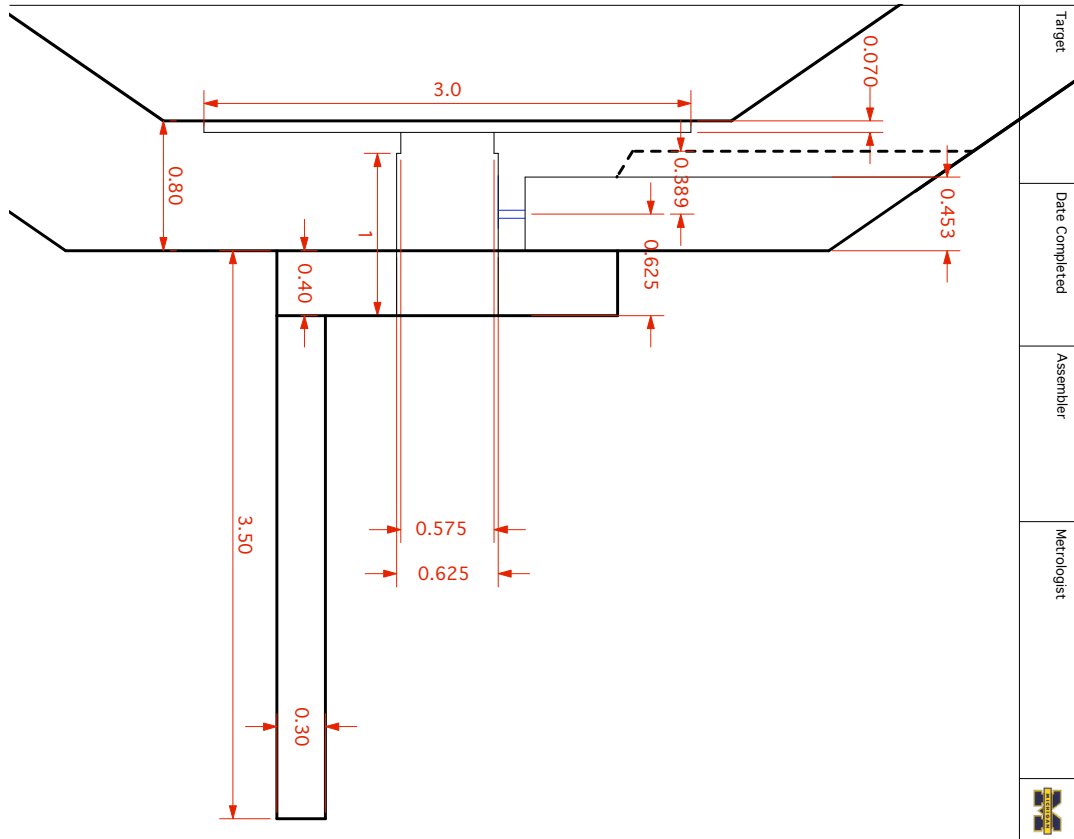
Internal structure and dimensions of the August 2010 target design in the vicinity of the drive disc and shock tube. Dimensions are in mm.
